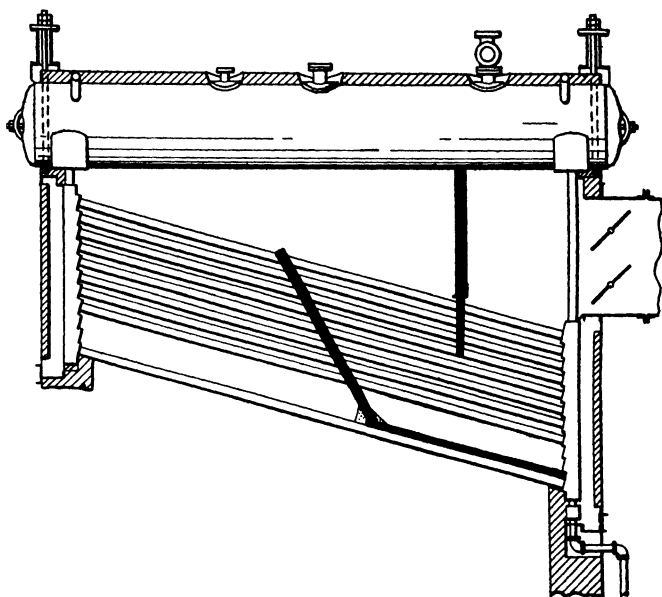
Straight-tube longitudinal-drum sectional-header boiler. (*Foster Wheeler Corporation.*)
